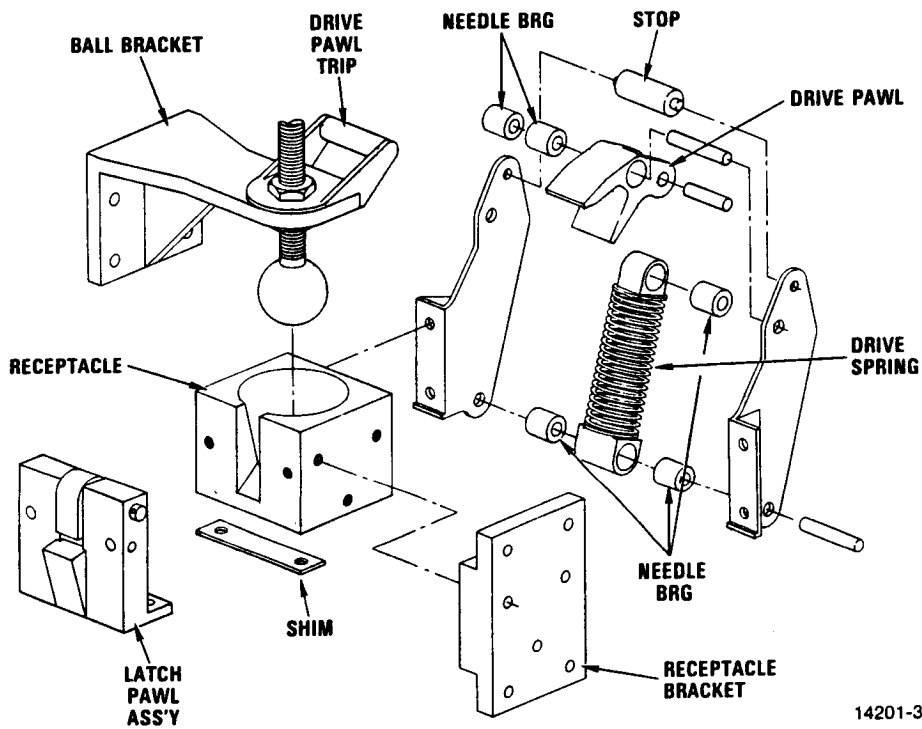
Exploded View of Powered Latch Shows that Spring and Drive Components may be added to Standard Latch Assembly.
